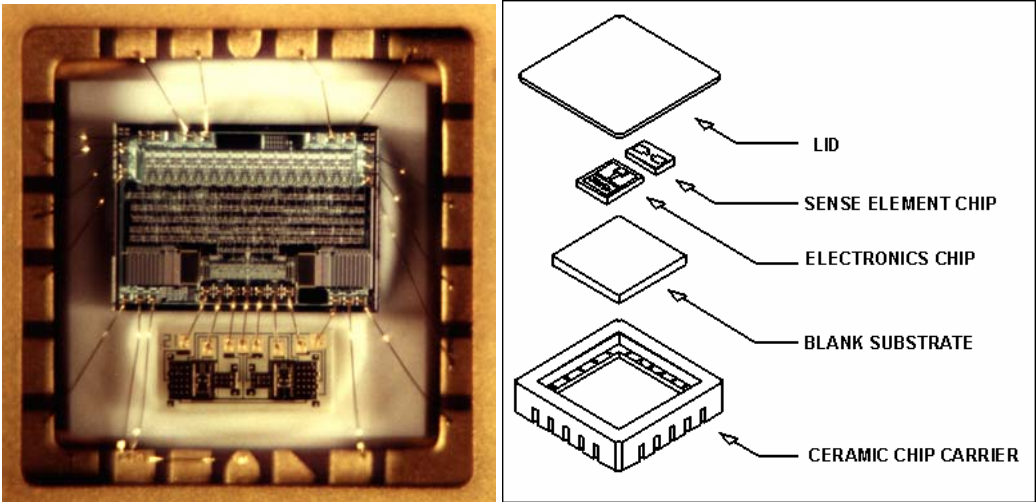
Photograph of the interior of the chip (left) and exploded schematic drawing (right).
